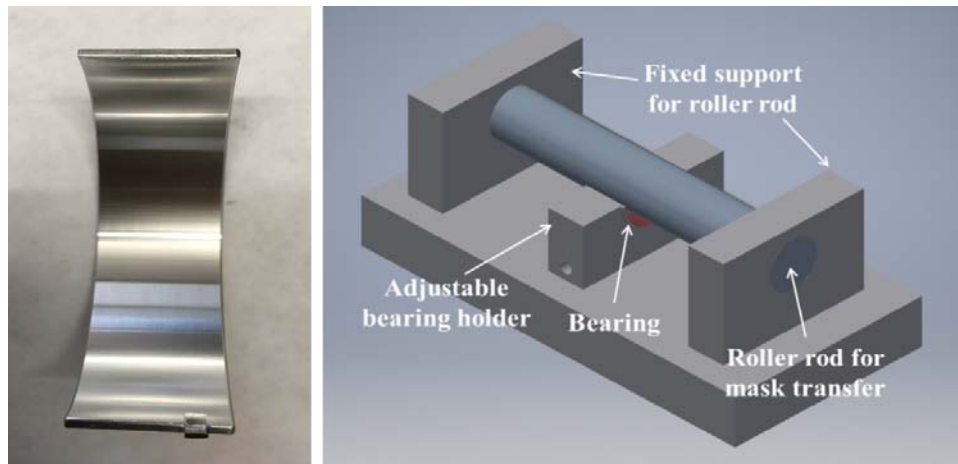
Conformal contact press jig for putting on soft mask on highly concave bearing surface
